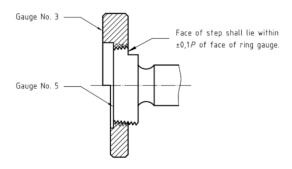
Gauging of a Parallel threaded ring gauge acc. to ISO 7-2:2000.
